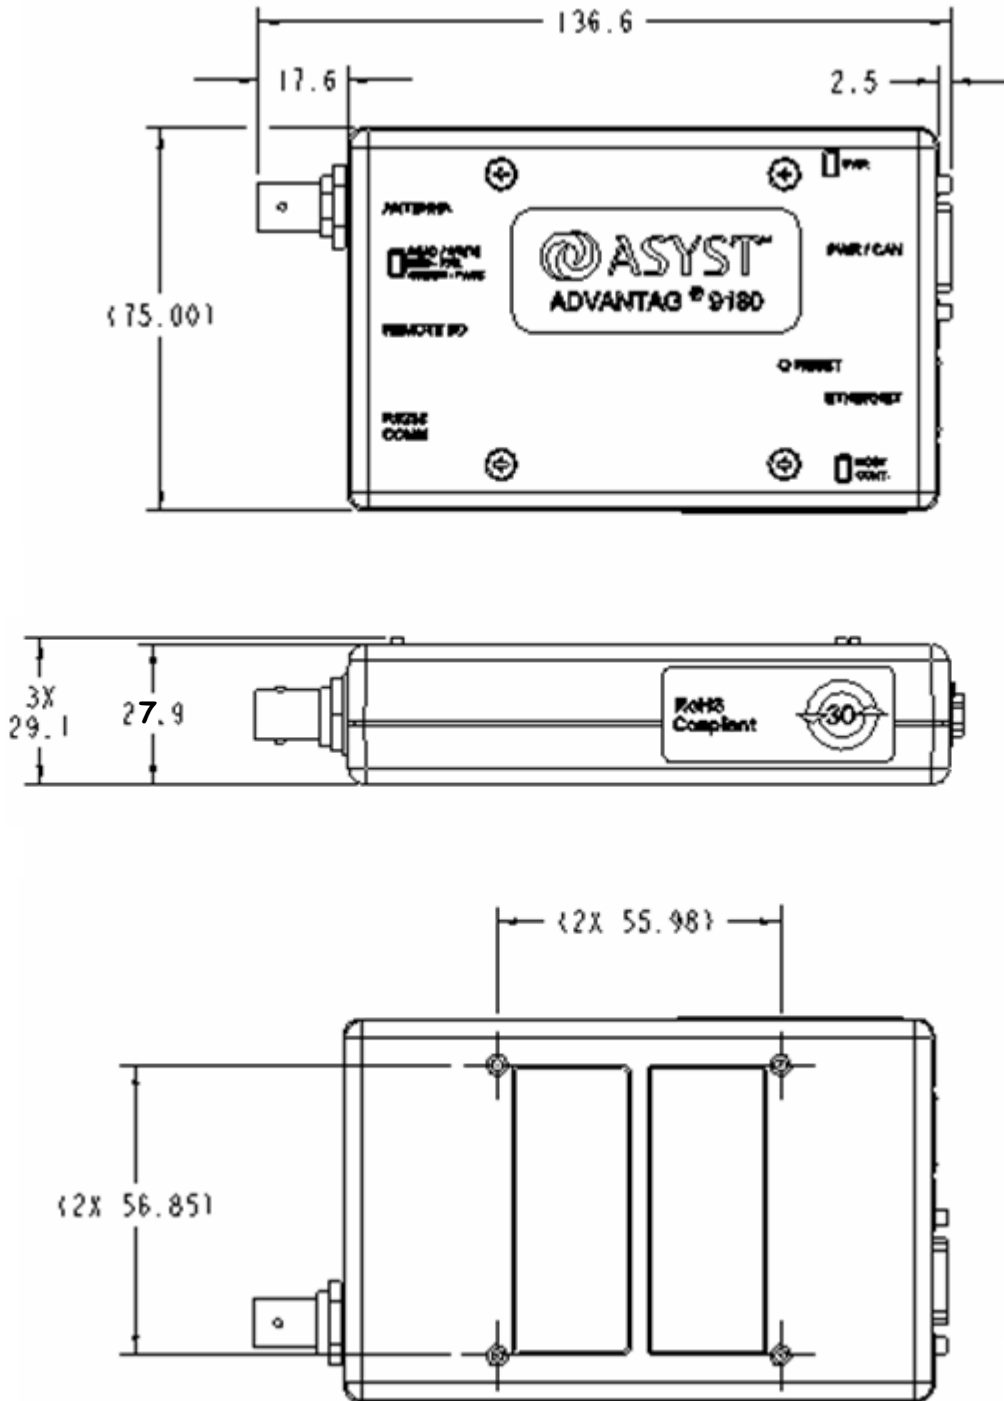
Outline Drawing, AdvanTag 9180 Reader
